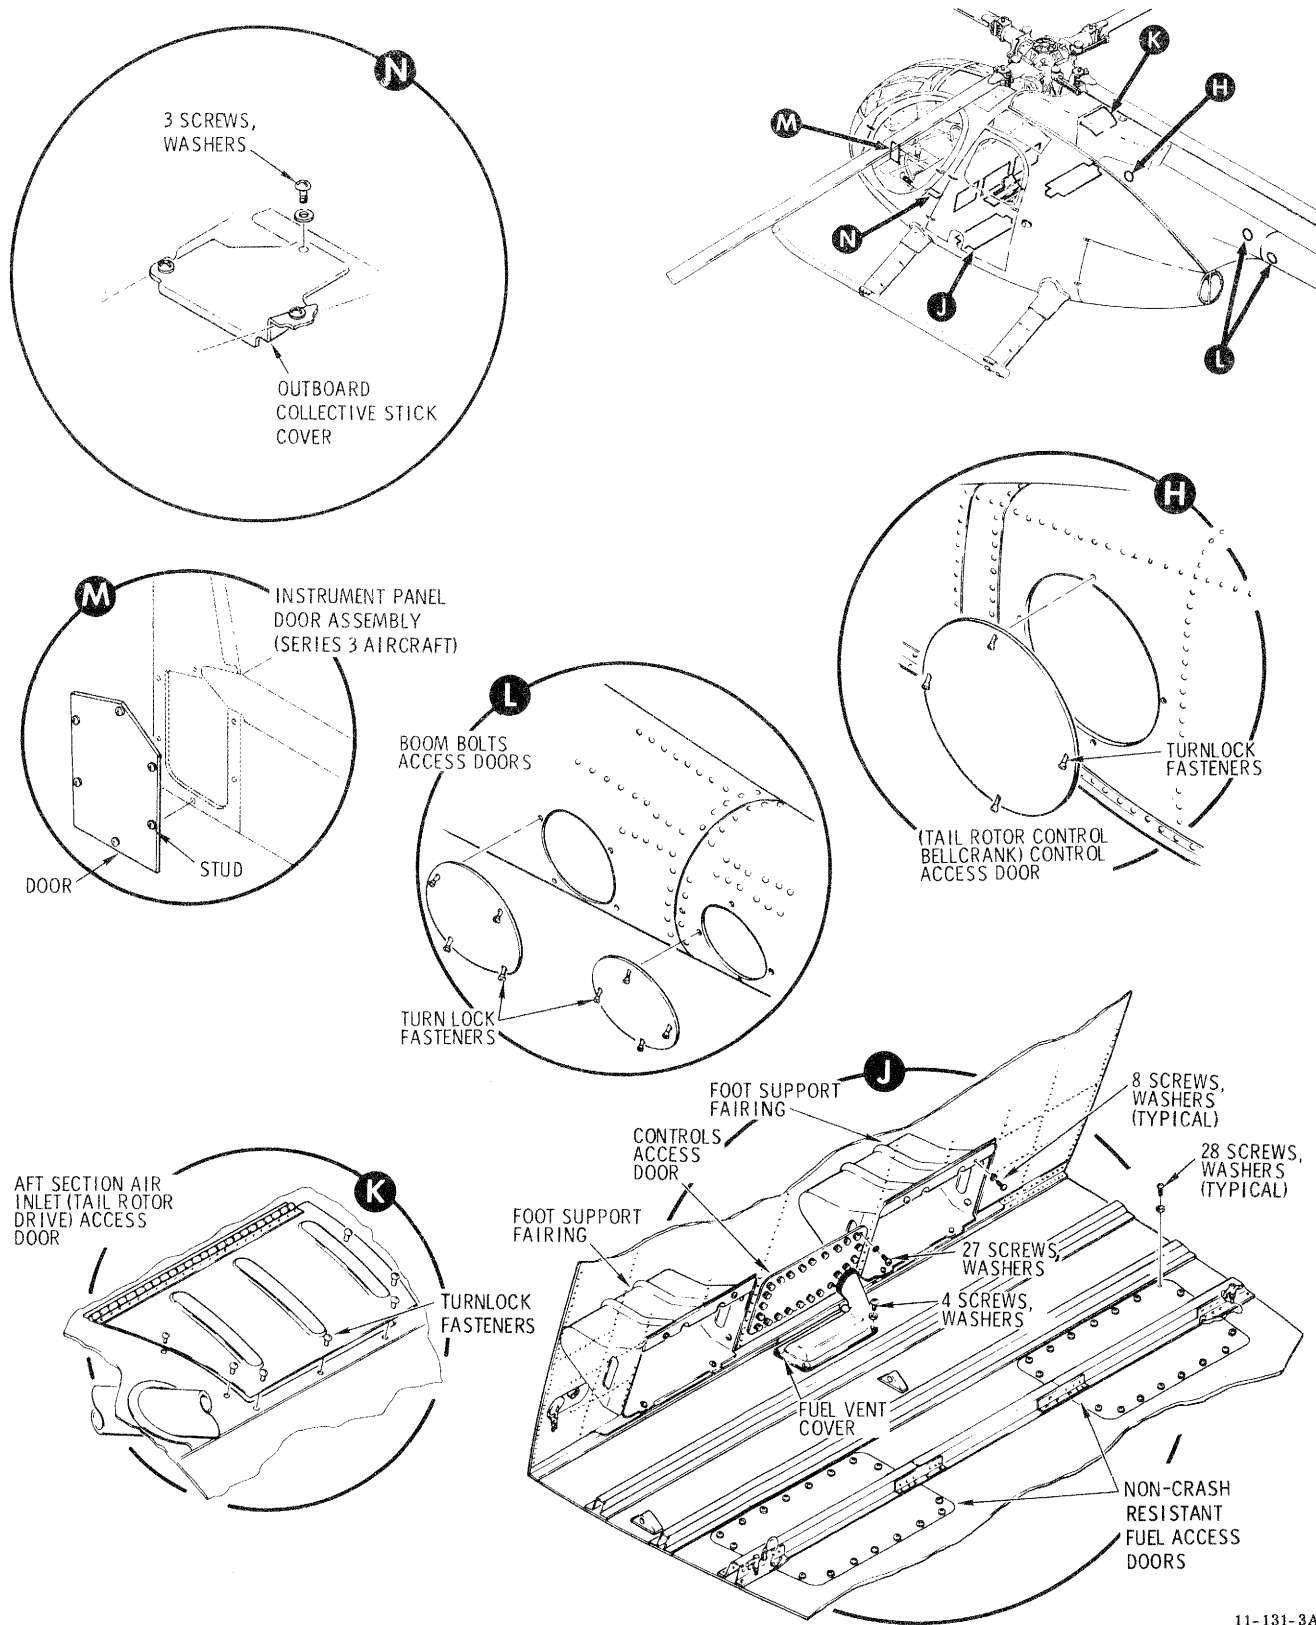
Access and Inspection Provisions. (sheet 1 of 4)
